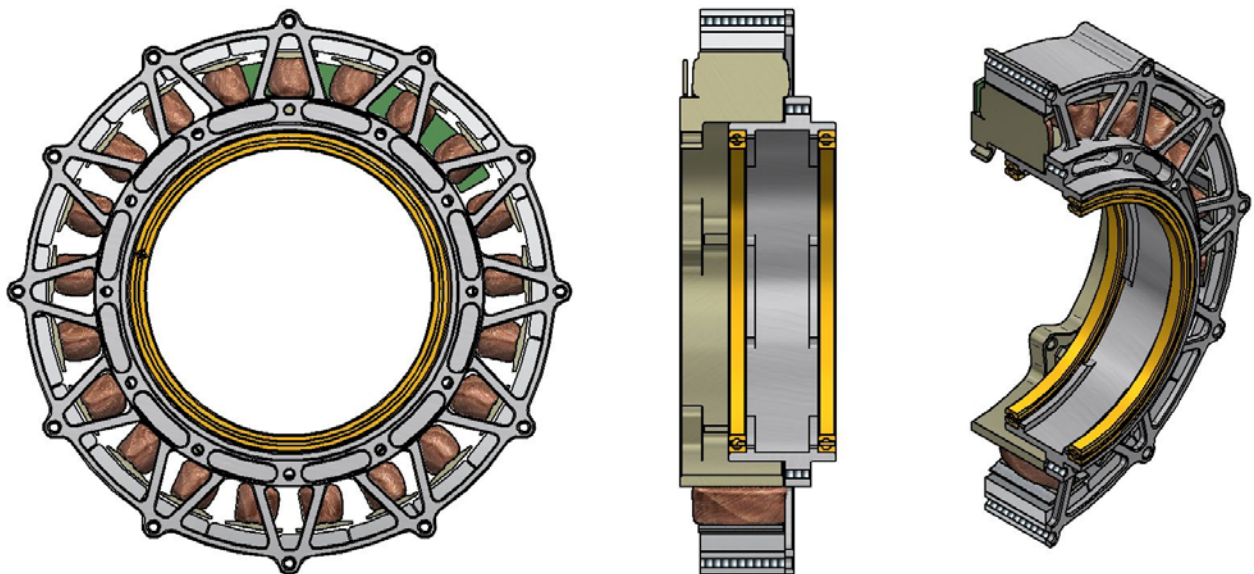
Stator, rotor, rotor carrier and rotor bearings.
